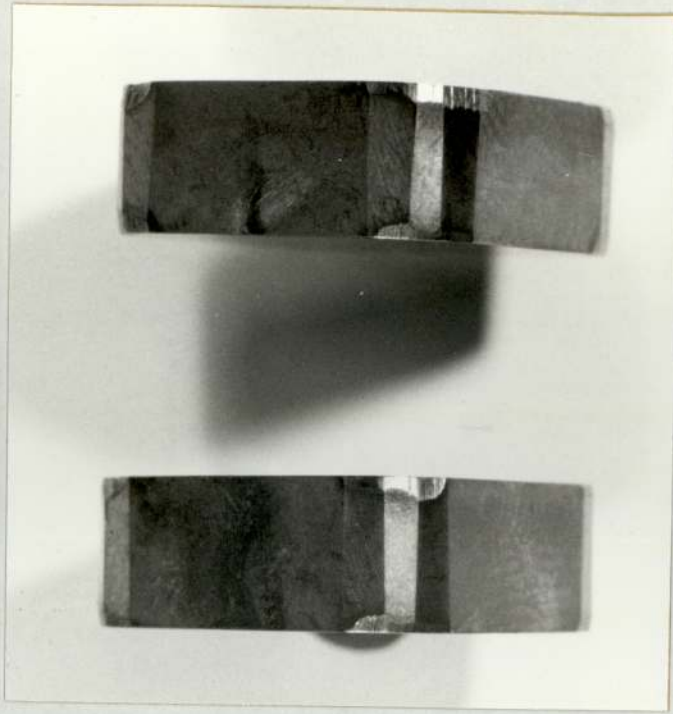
Flank Wear on One Insert using with the Sandvik Cutter
